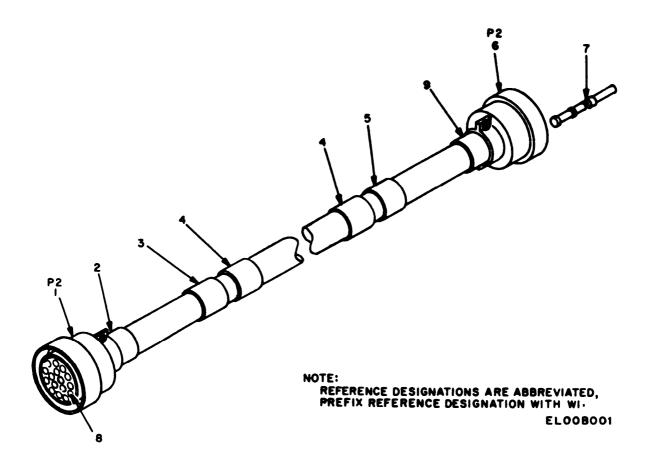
Cable Assembly, Special, Electrical CX-10876/U.
